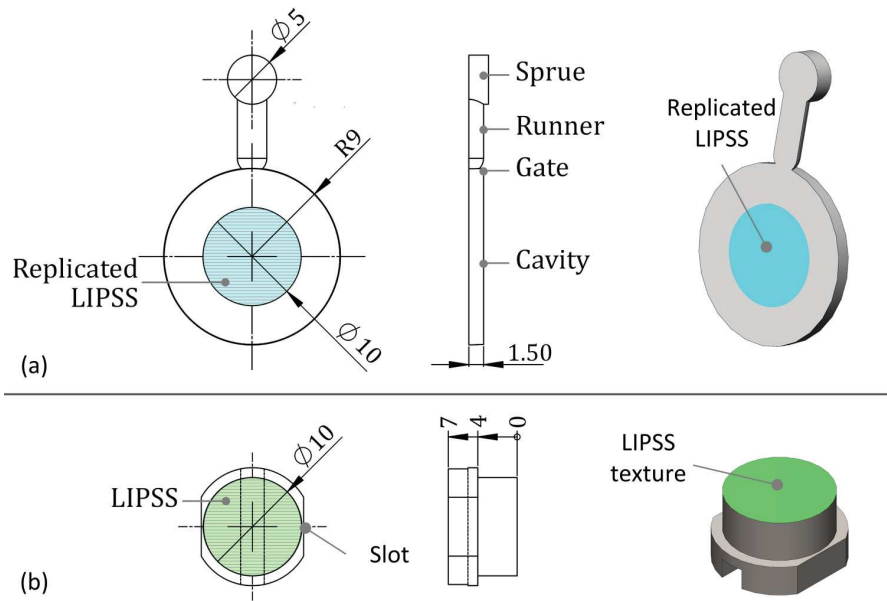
Design of (a) the molded part and of (b) the mold insert.
